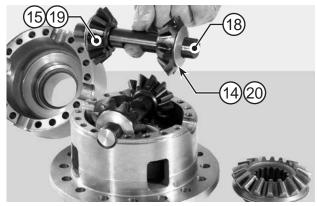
Install the planetary gears (15, 19) and spherical shoulder washers (14, 20) onto the shafts (18). Install the planetary set.
